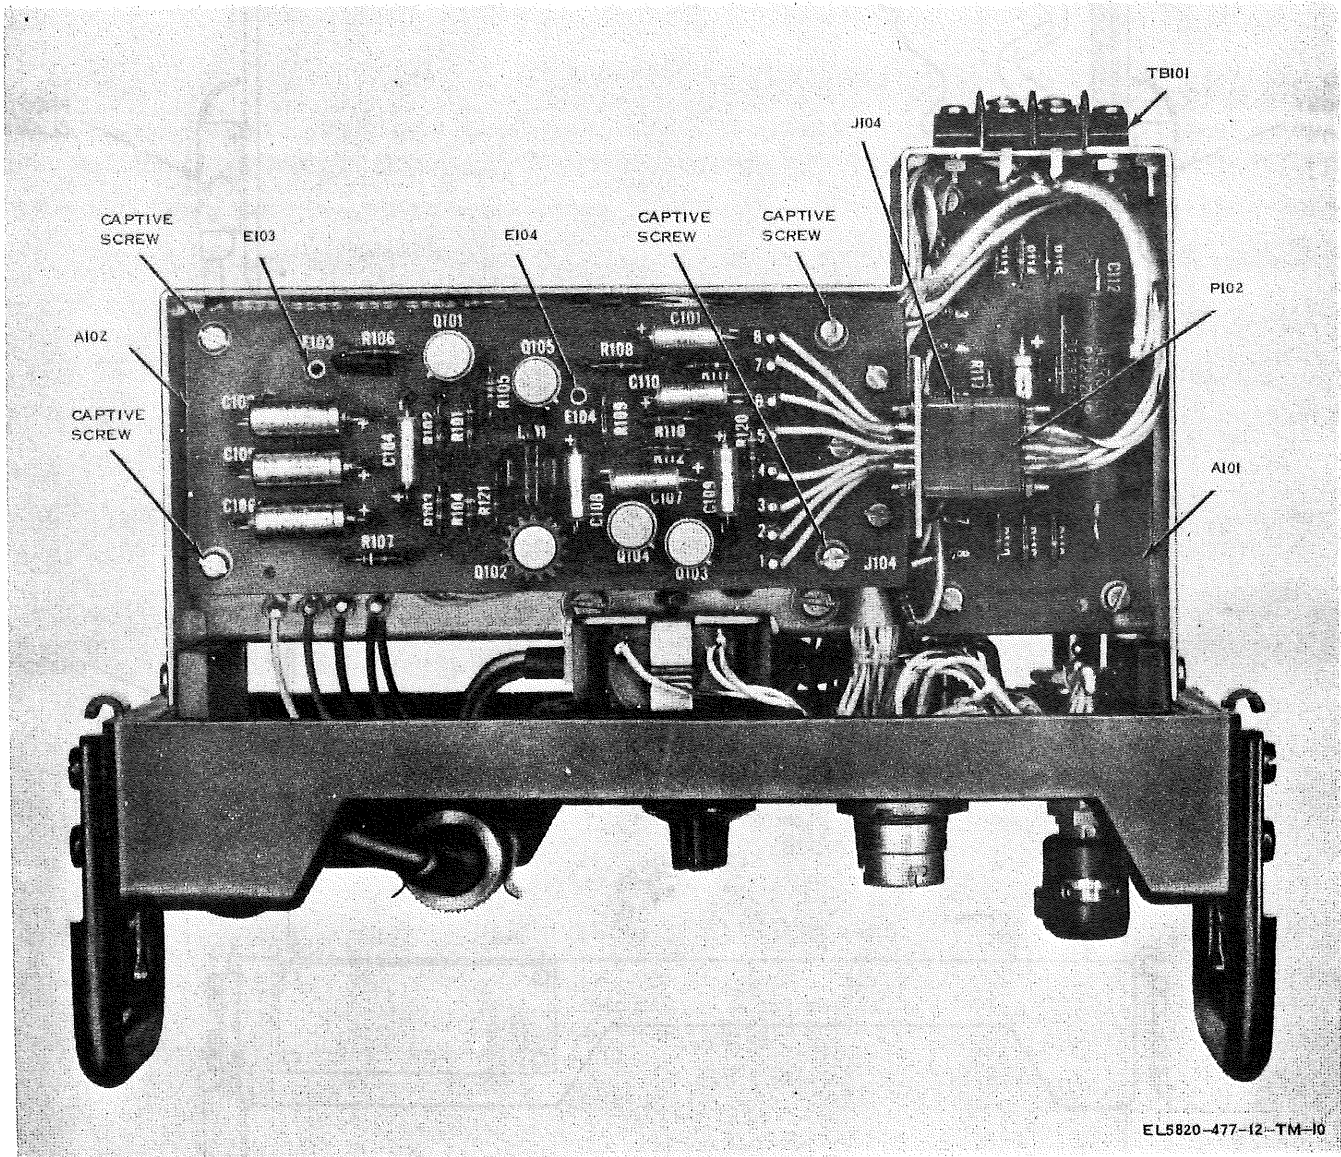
Control, Radio Set C-2328/GRA-39, case removed, parts location (C-2328A/GRA-39 and C-2328B/GRA-39 are similar.)
